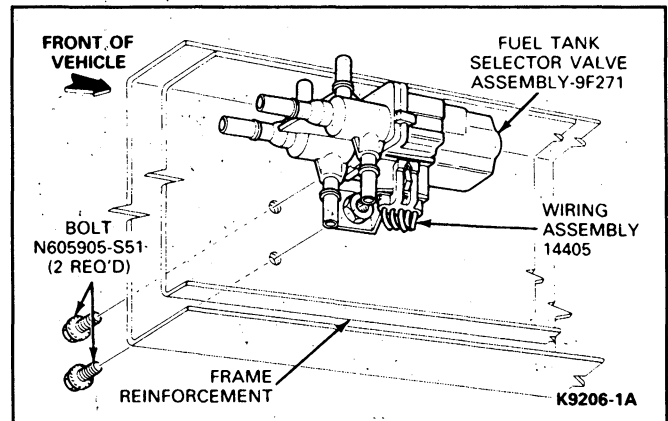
6-Port Fuel Tank Selector Valve—F-Series (7.3L Diesel)
